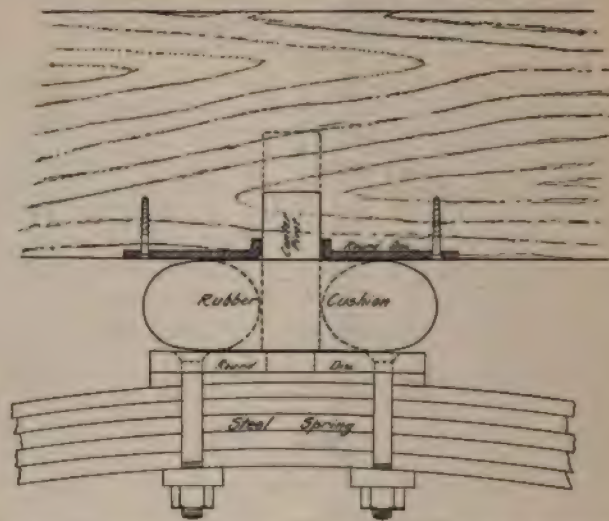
shows the cushions applied to a motor vehicle, having the ordinary form of springs, and drawing No. 4 is supplementary to drawing No. 3, showing one method by which the pneumatic cushion can be attached to ordinary carriage springs.
